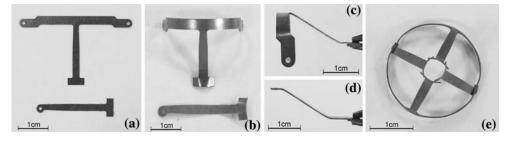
Assembly of Nitinol cutting ring: (a) laser-cut blade and supporting strut; (b-d) blade and strut after shaping; (e) assembled cutting ring
